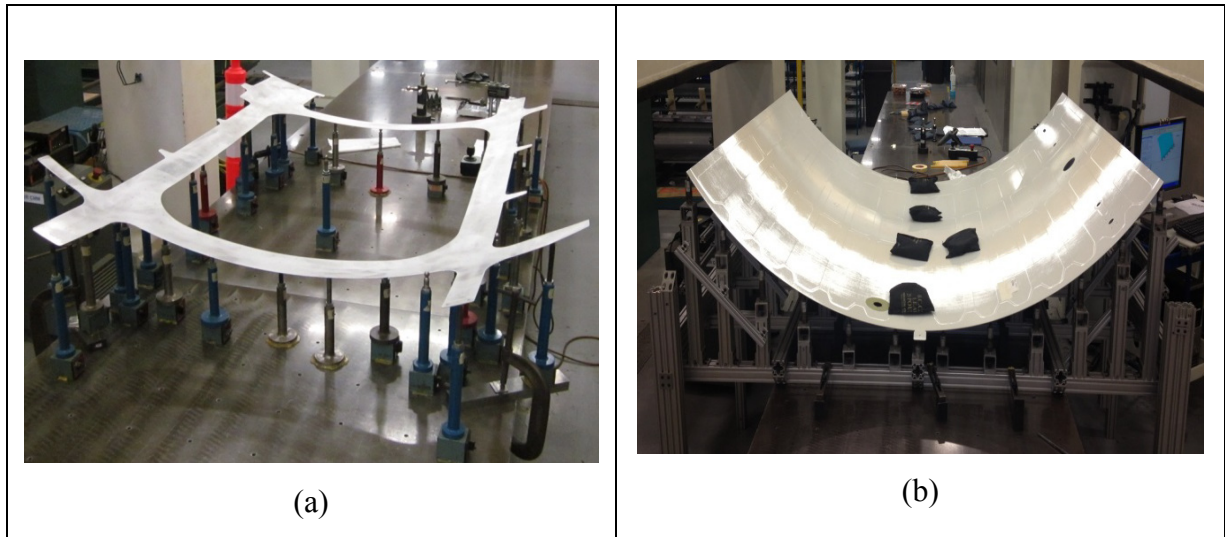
Inspection of aerospace compliant parts using a jig – Bombardier Aerospace.
